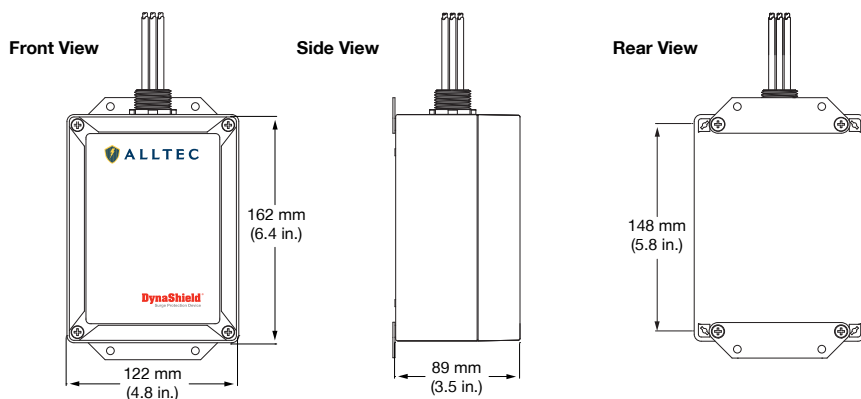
Dimensional Drawing [ADSx050(2F) & ADSx100(2F) Models]
